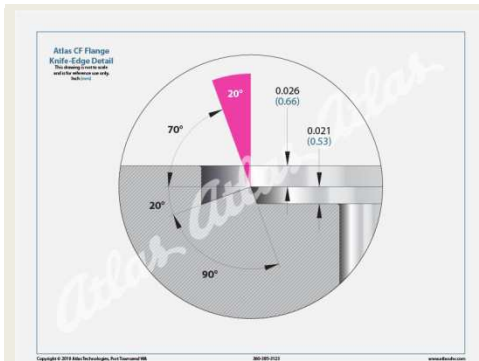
20 degree back bevel on knife edge improves seal by making it more tolerant to thermal cycles as well as enhancing its durability.
